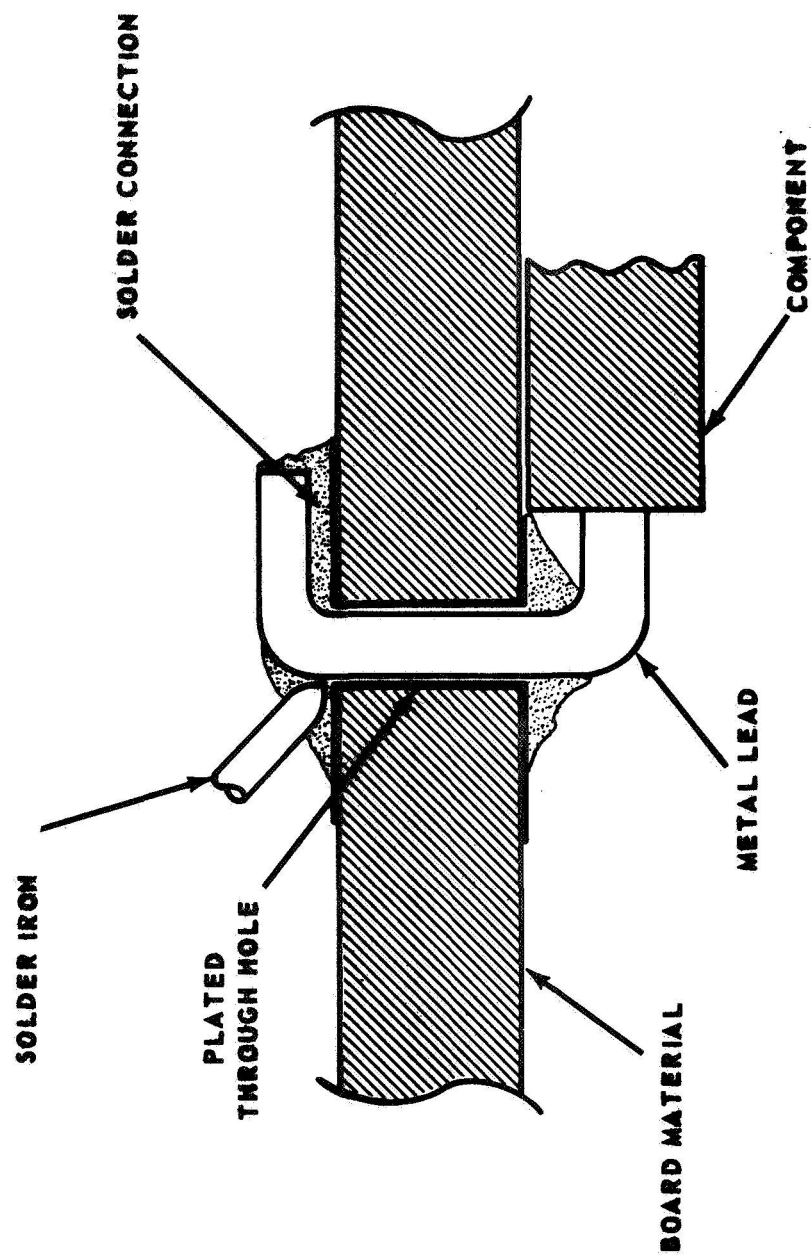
PRINTED WIRING BOARD(PWB) SOLDER JOINT
